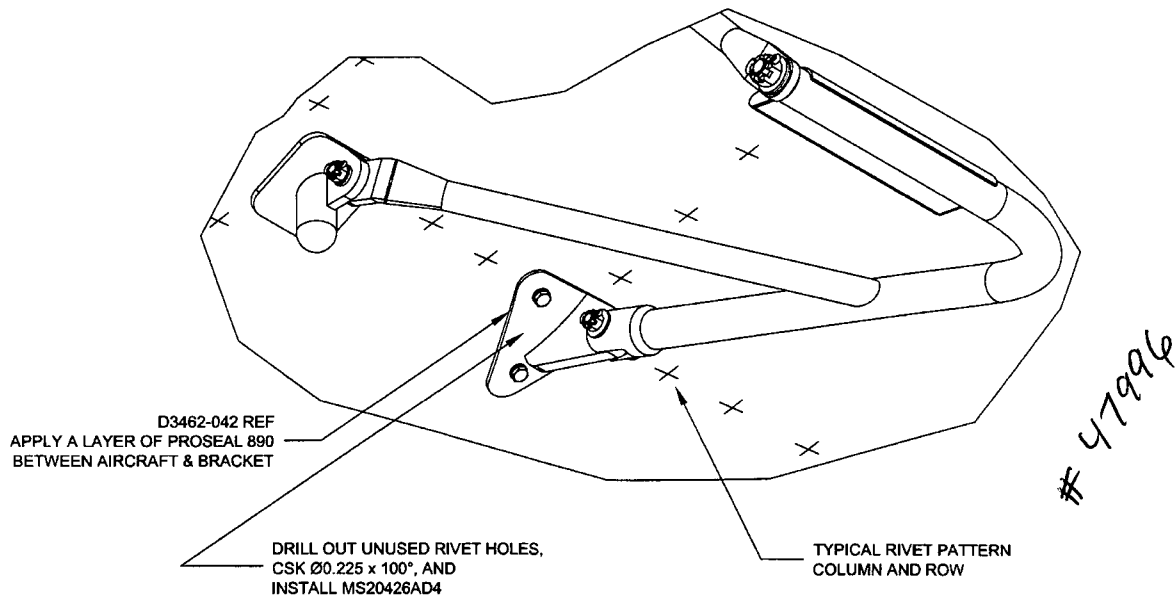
Detail View D3462-042 Bracket Assembly (-032 Installation, Shown) D3462-041, (-031 Installation Opposite)
